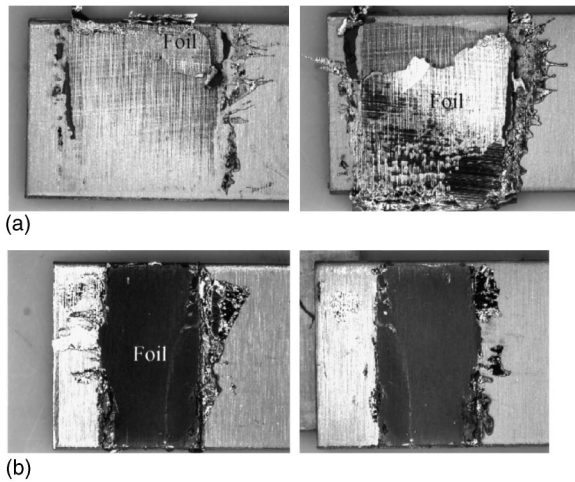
Fracture surfaces of the Al joints obtained by optical stereomicroscopy: (a) joint formed with a 35- μm foil, showing very limited wetting of the Al components, and (b) joint formed with a 120- μm foil with full wetting of the Al components.
